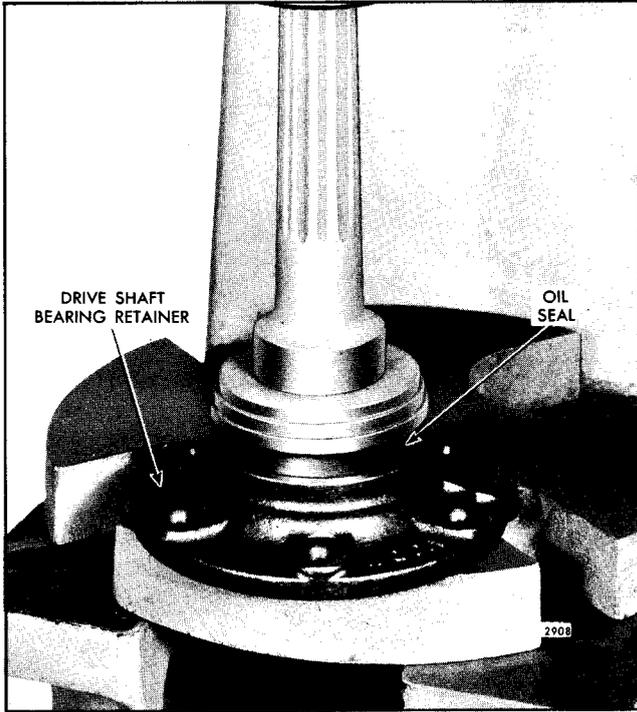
Installing Oil Seal in Drive Shaft Bearing Retainer
